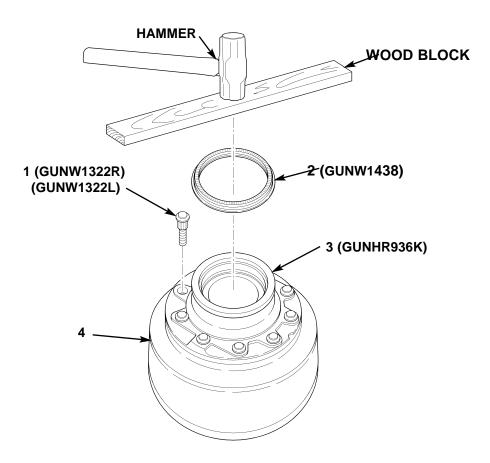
Installing Wheel Studs and Rear Tone Ring.
